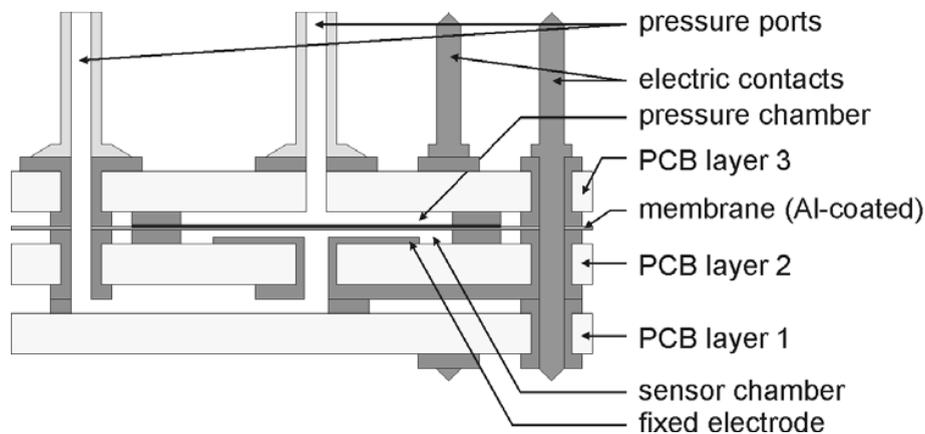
Schematic drawing of a capacitive pressure sensor based on PCB technology.
